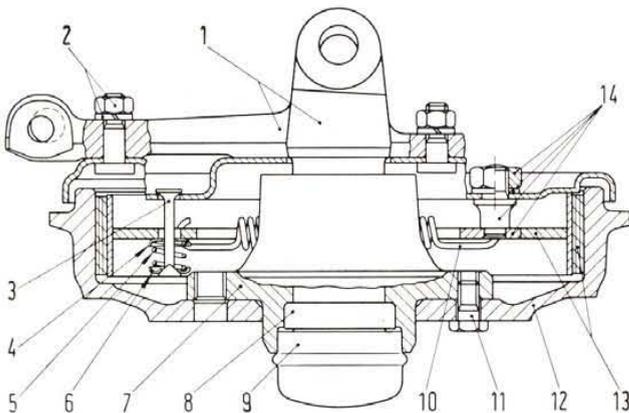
Sectional view of left side front wheel. (Up to car with No. for spare 802091).
